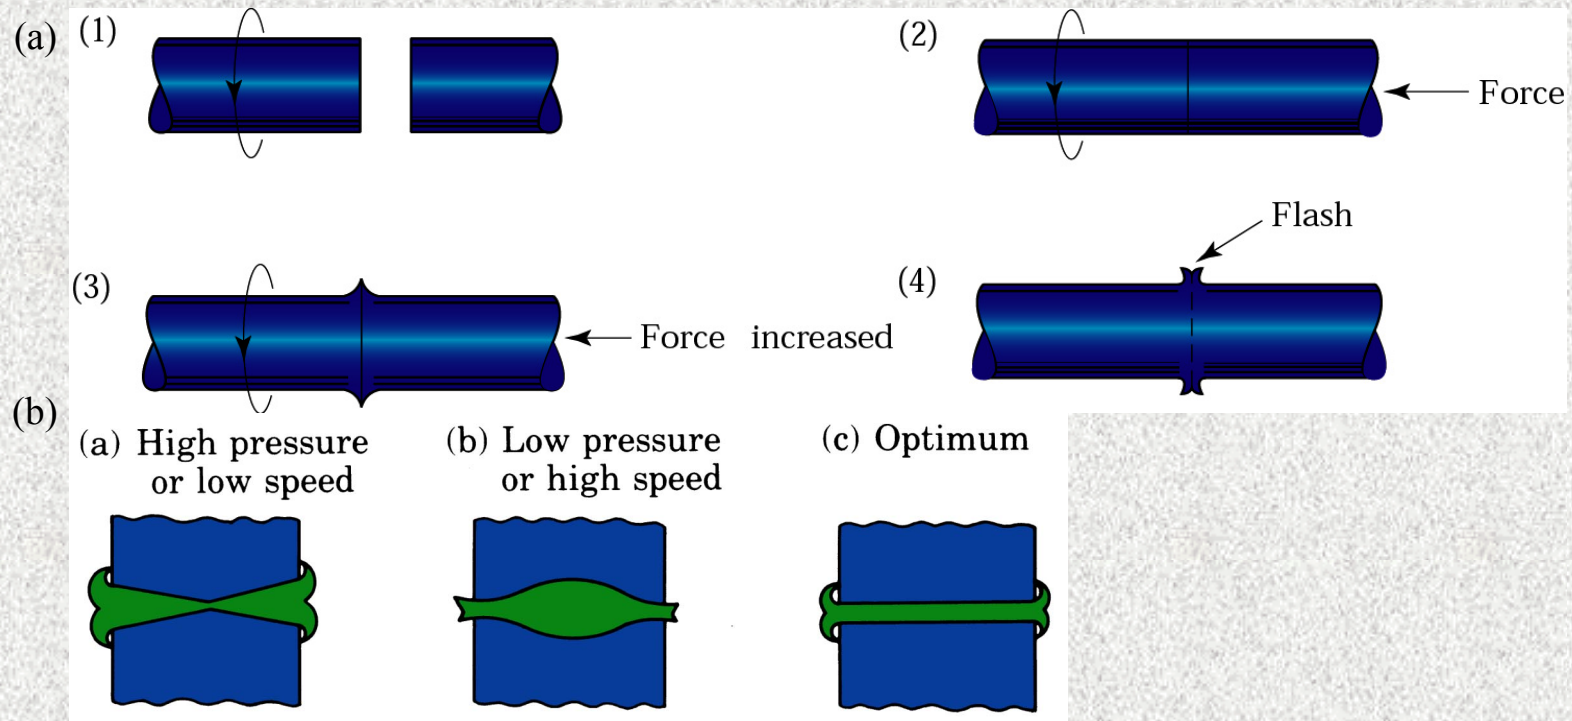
(a) Sequence of operations in the friction welding process: (1) Left-hand component is rotated at high speed. (2) Right-hand component is brought into contact under an axial force. (3) Axial force is increased; flash begins to form. (4) Left-hand component stops rotating; weld is completed. The flash can subsequently be removed by machining or grinding. (b) Shape of fusion zone in friction welding, as a function of the force applied and the rotational speed.
